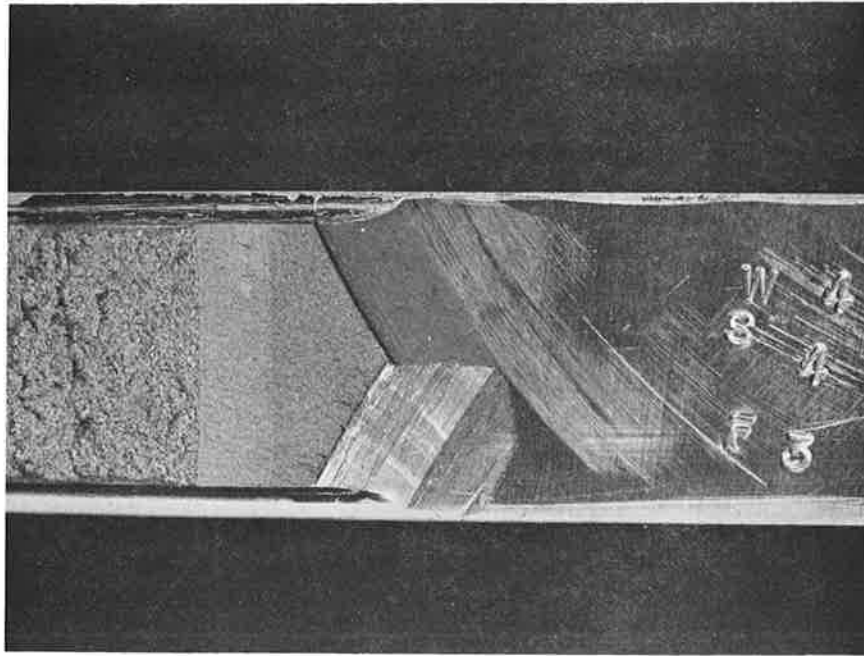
FRACTURE APPEARANCE OF SPECIMEN 44-F3 TAKEN FROM CLASS A WHEEL
